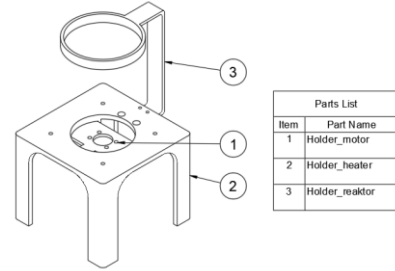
Assembled reactor stand integrating the motor mount, heater holder, and reactor ring holder
